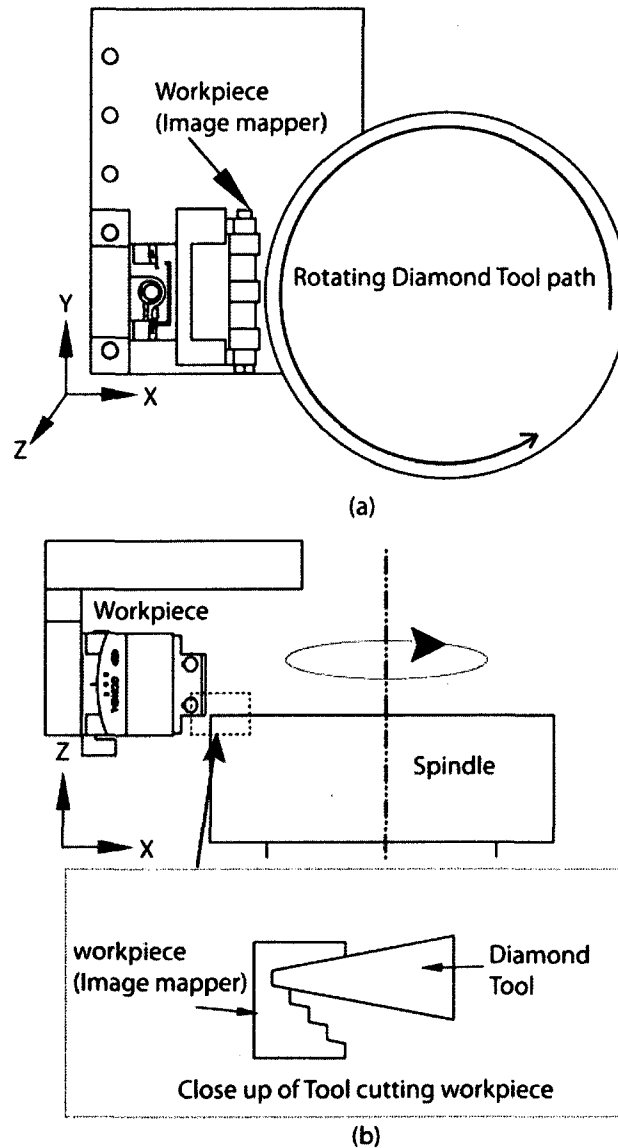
(a) Front view for fabrication of an image mapper using diamond raster fly cutting technique. (b) Top view of an image mapper during fabrication. The close up shows the diamond tool cutting the facet profile into the workpiece.
